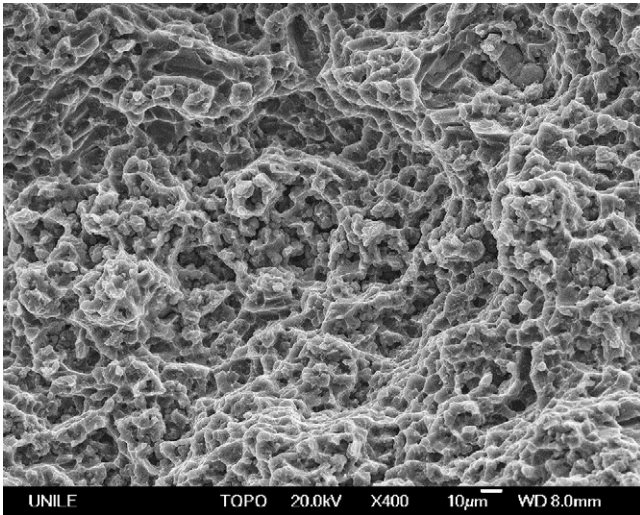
Fracture surfaces of the FSP tensile tested material.
